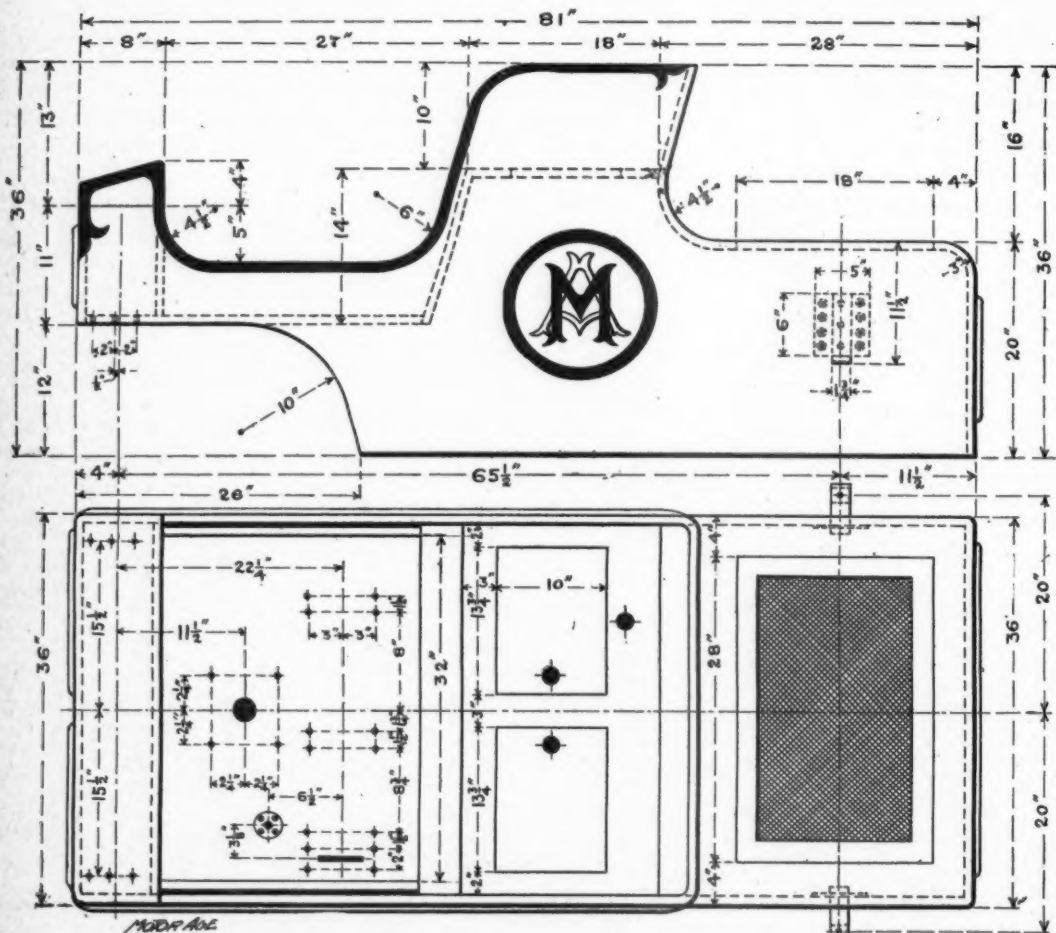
SIDE ELEVATION AND PLAN OF BODY.
